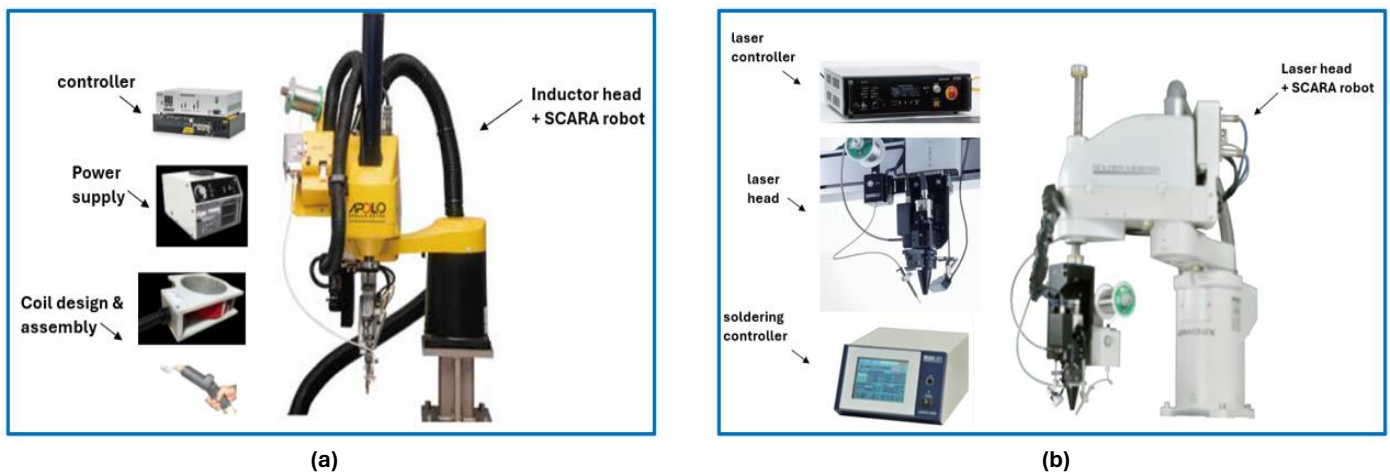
(a) Components of the heat induction soldering system [73] [74], (b) laser soldering system (Input: member of Japan Unix). Blue border: tailored to L-F module assembly.
